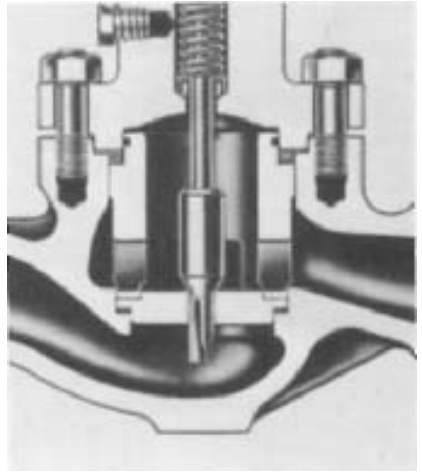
An extreme in reduced trim for a cage valve (Fisher Controls)
